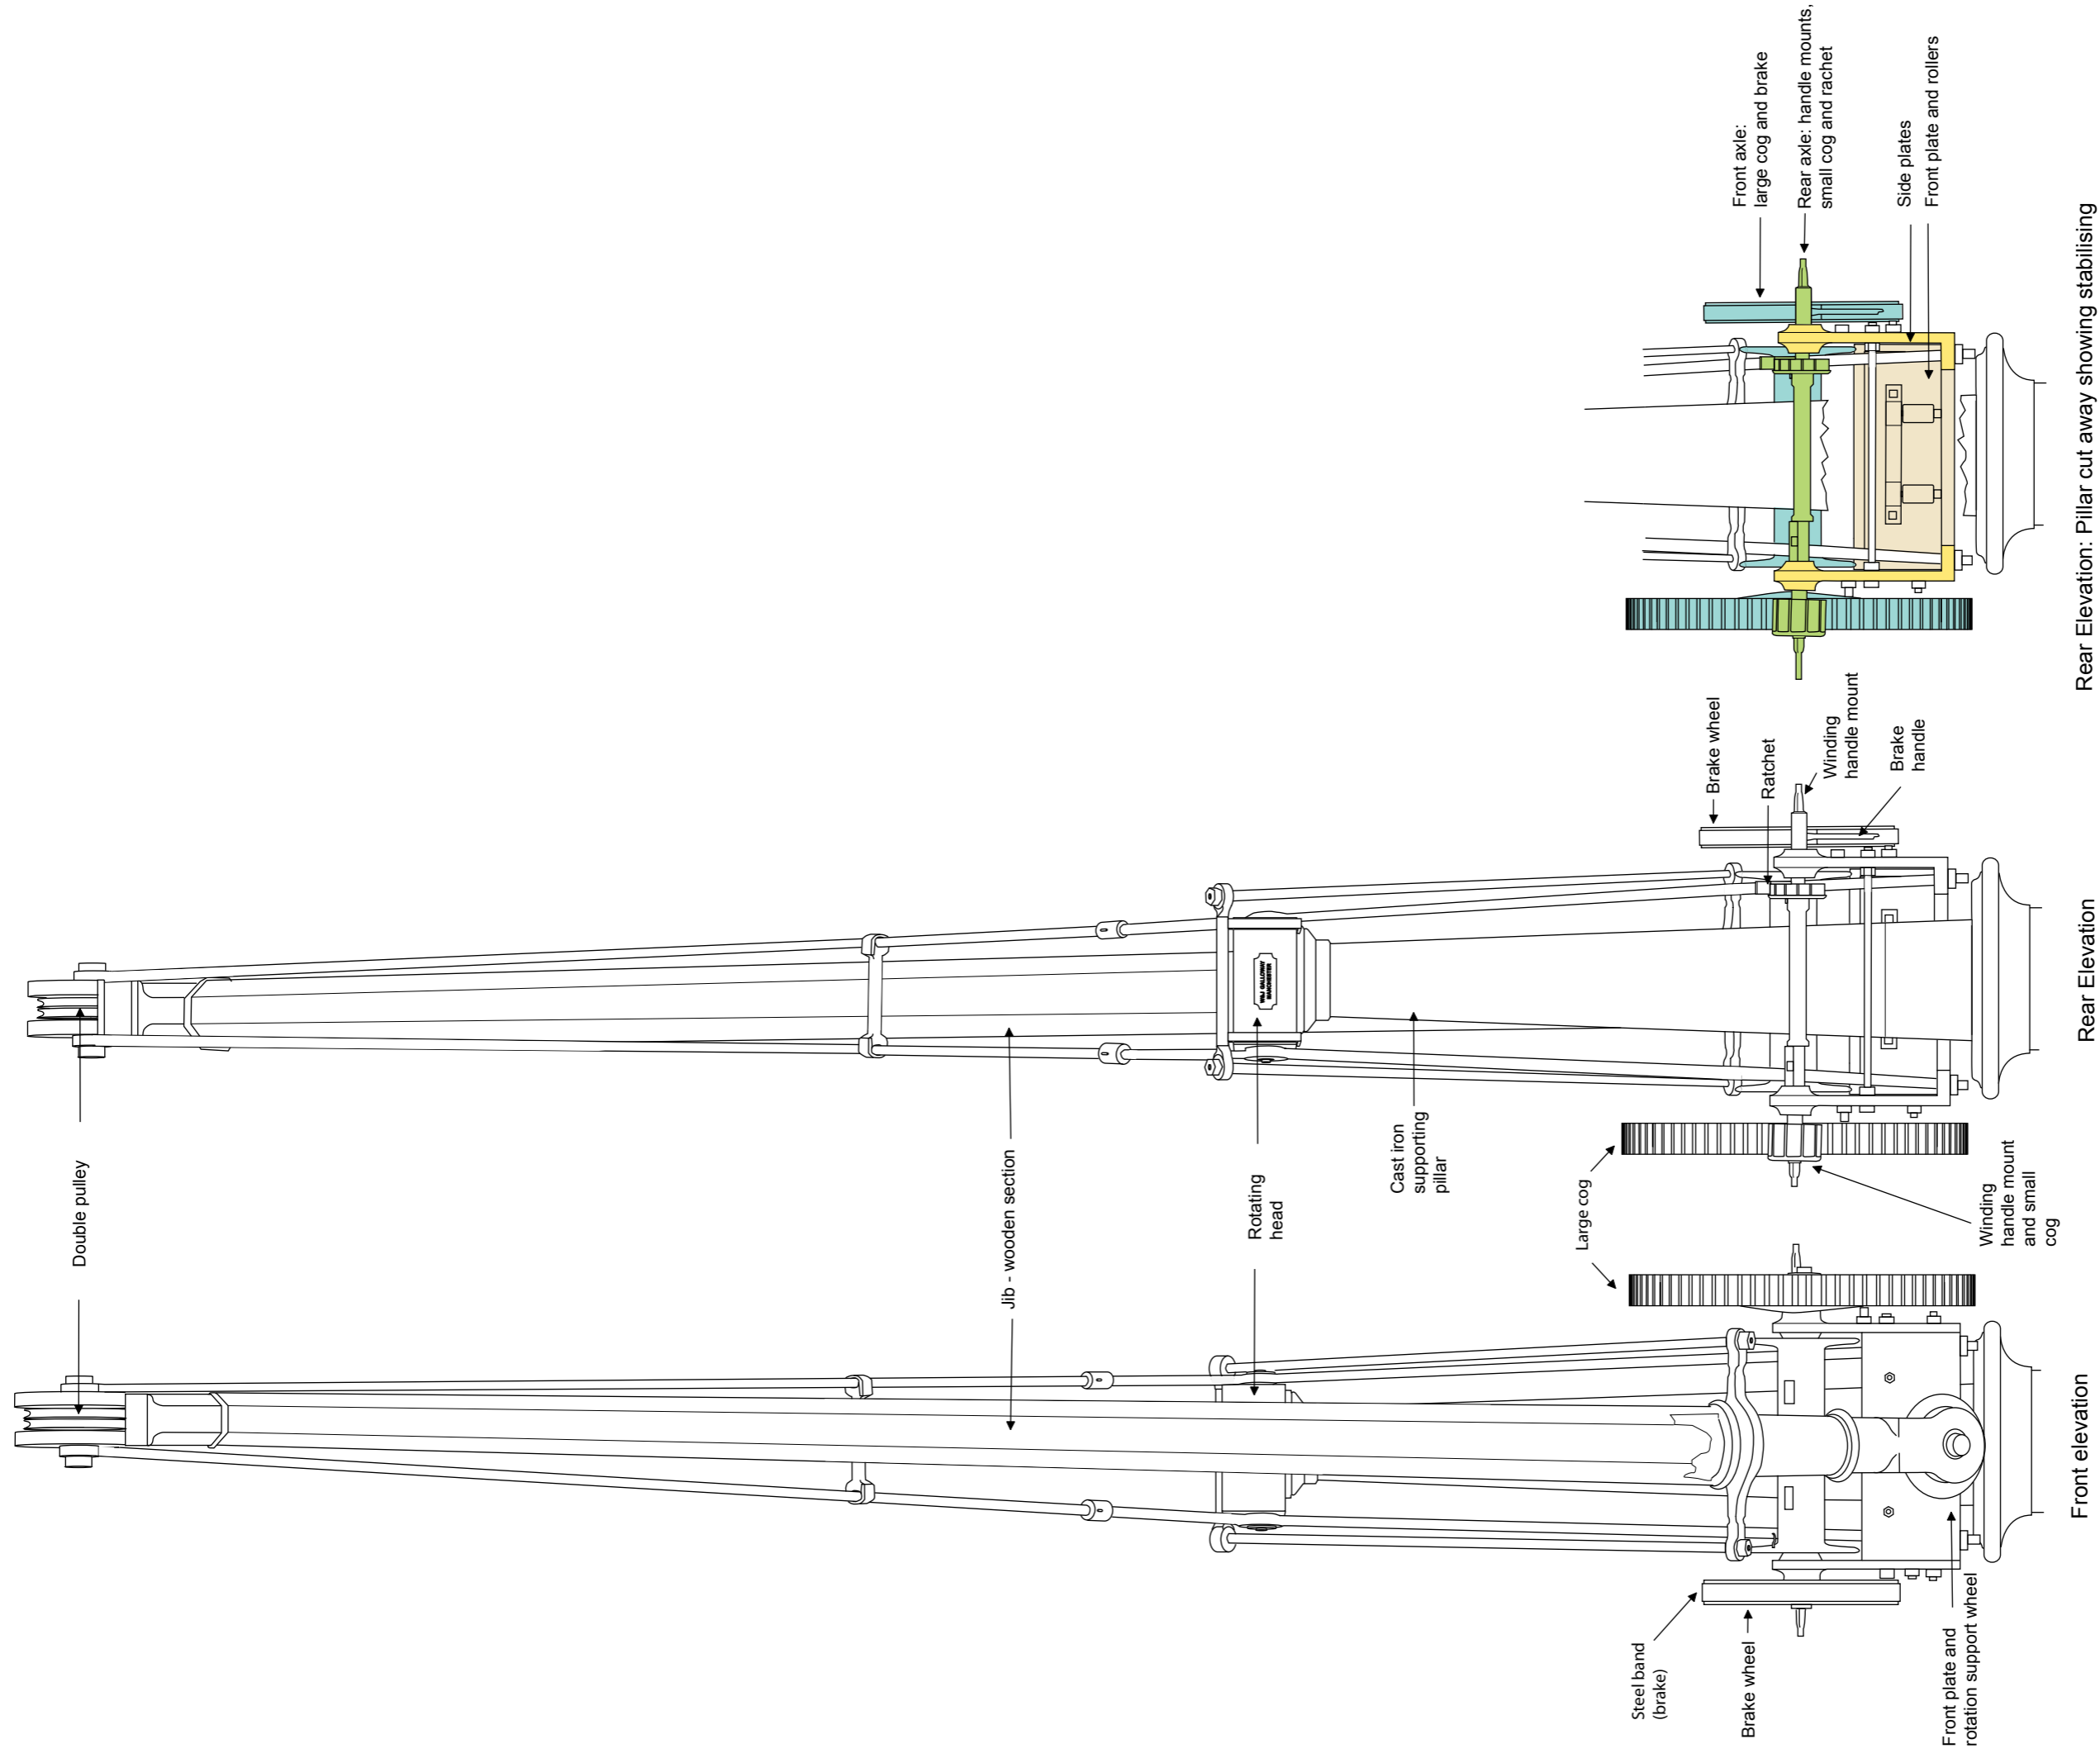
Site 3(13) Crane front and rear elevations and cut away
